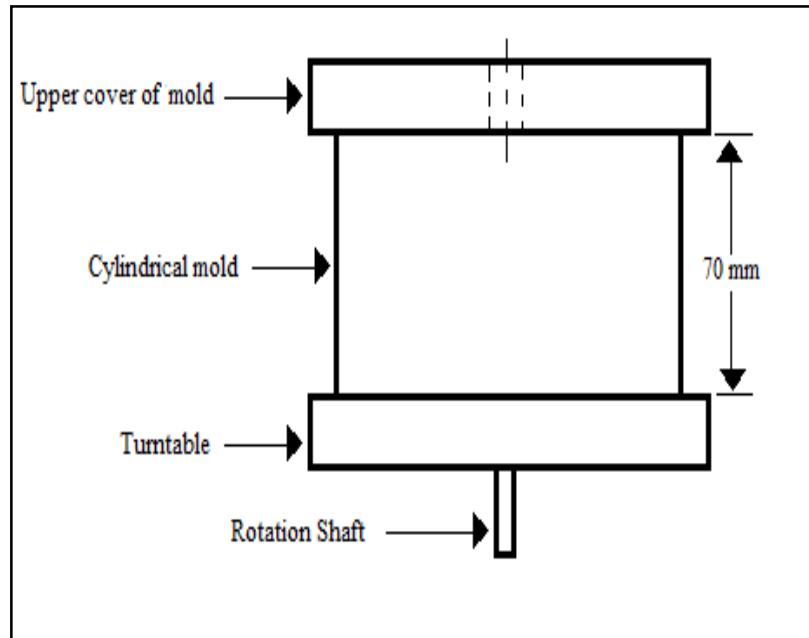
Design of the cylindrical mold, rotation shaft, upper and lower covers of mold.
